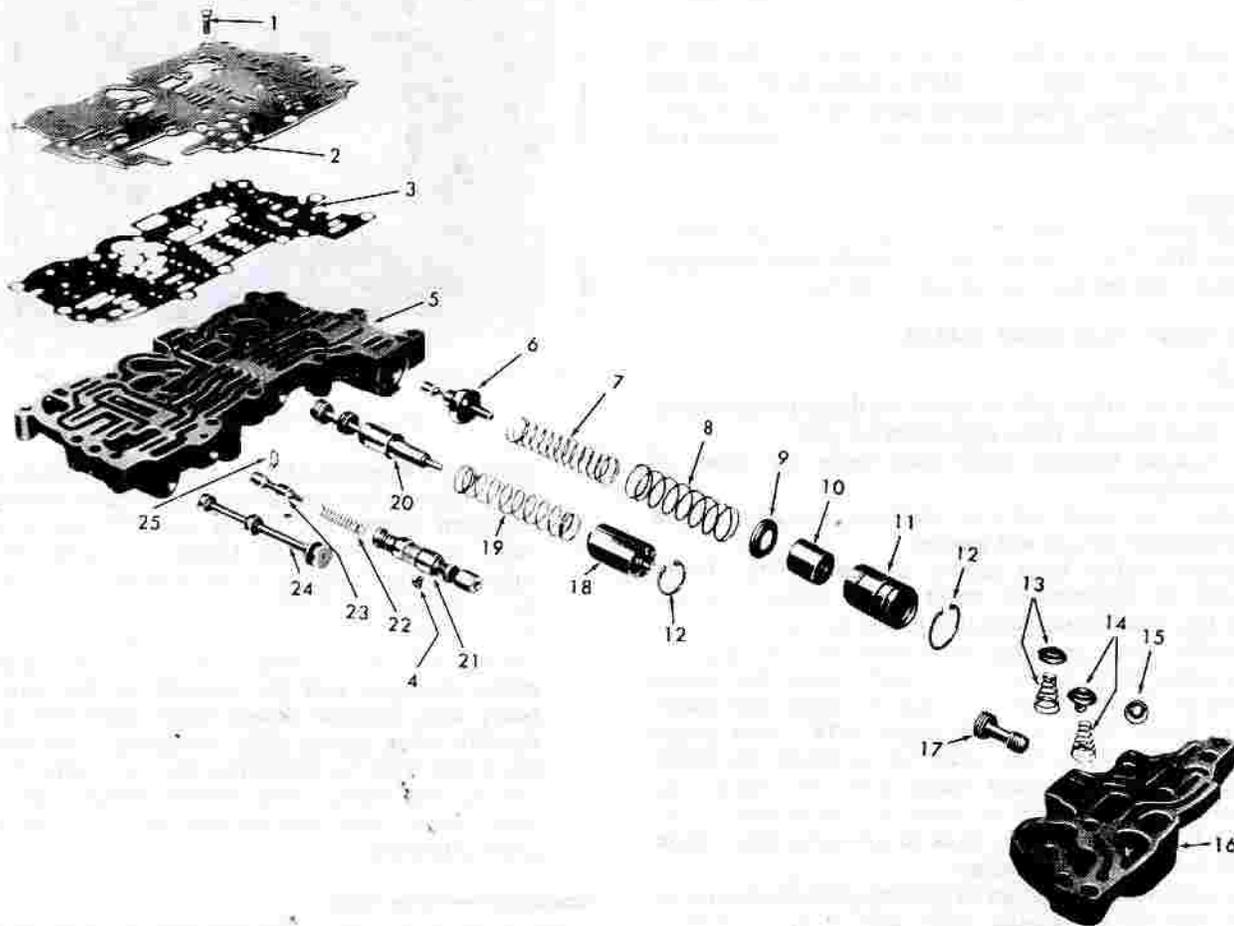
E-11—Corvaire Powerglide Valve Body—Exploded View
